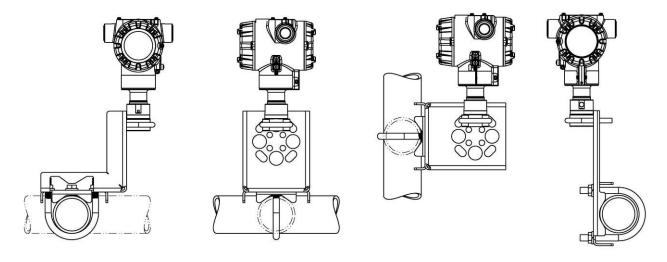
Typical mounting dimensions of STA722 & STA740 for reference
